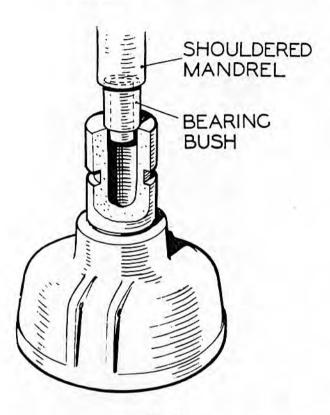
FITTING REPLACEMENT BEARING BUSH
